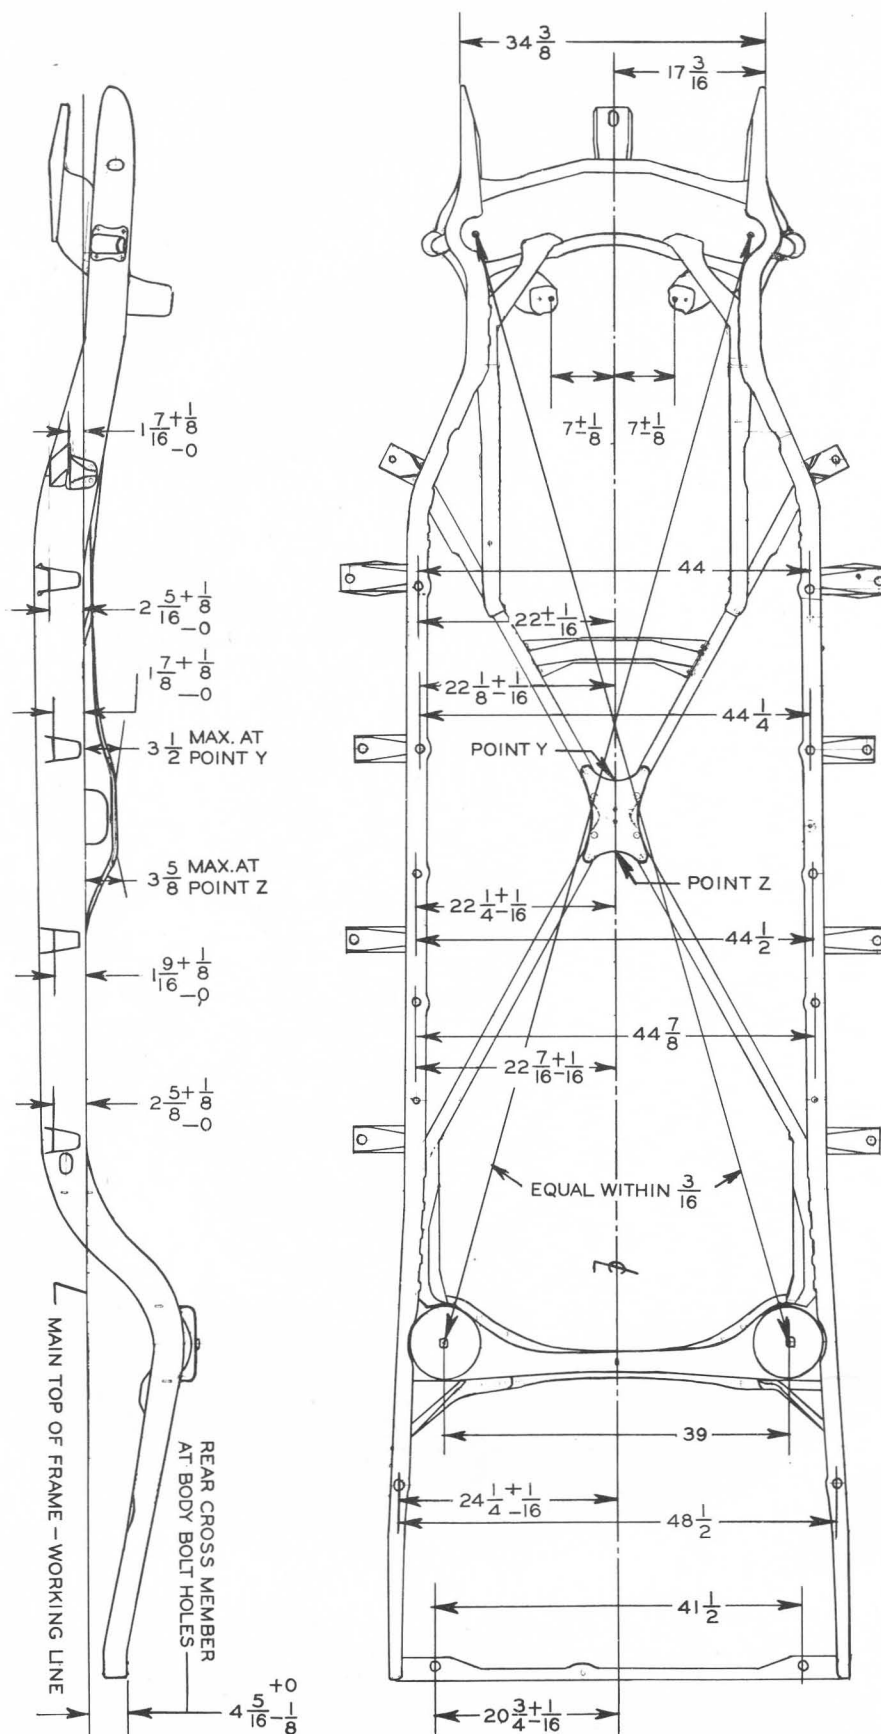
Frame Checking Dimensions—1949 Series 50
